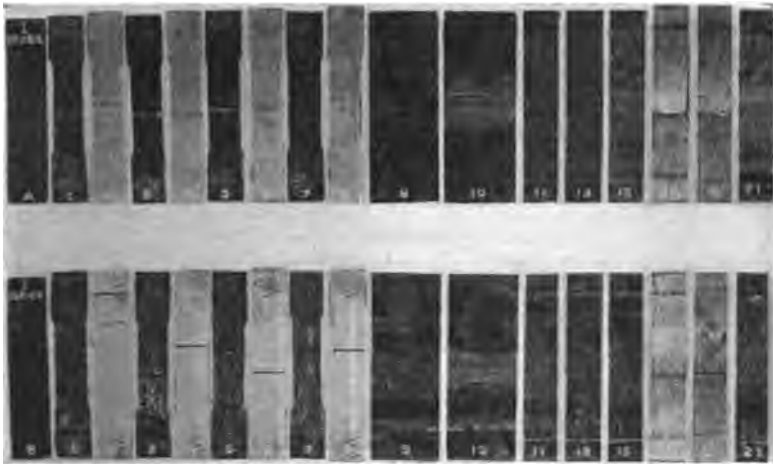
Showing tension and transverse test specimens of A and B sections rail 10062, after test. Specimens 1 to 8, inclusive, tension test specimens. Specimens 9 to 21, inclusive, transverse test specimens.
